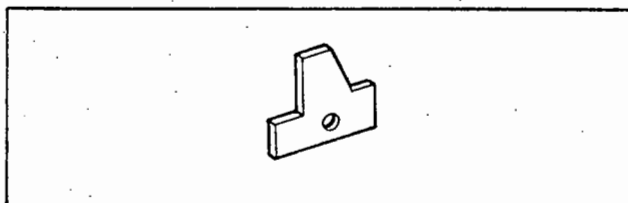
T25939 Enrichment Valve Screw Adjusting Assembly Gage
